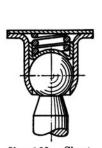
Sheetmetal ball-socket housing with cover fastened by spot welding.
